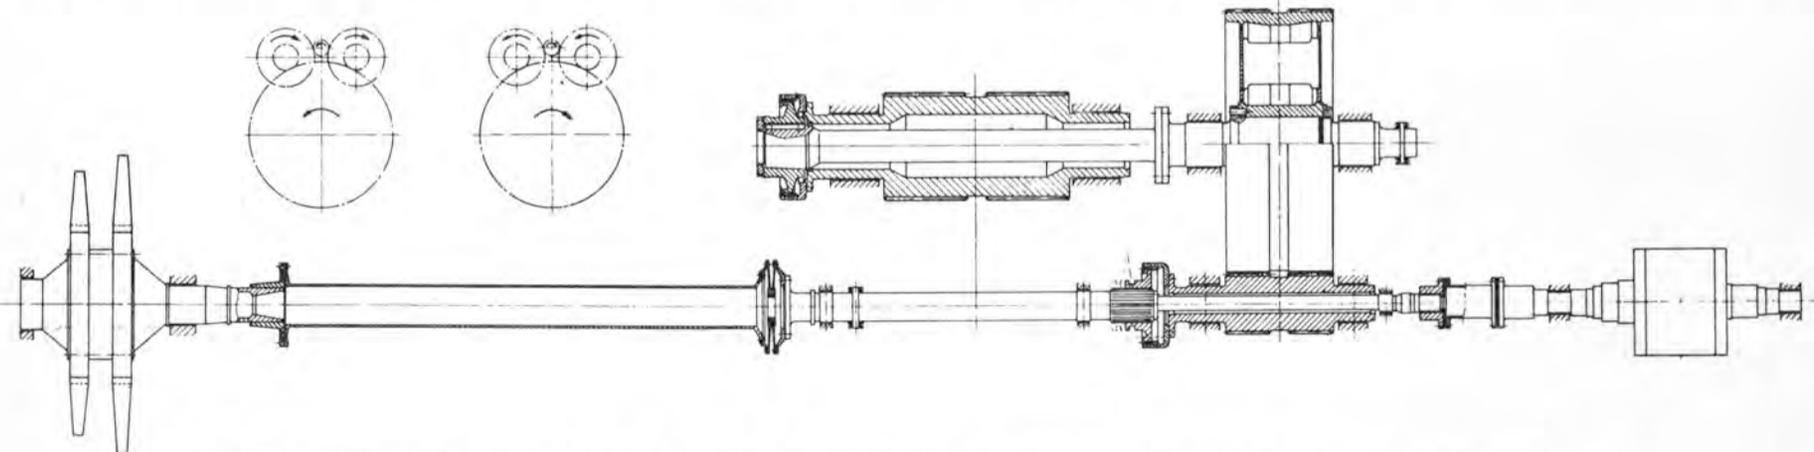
Layout of the high-speed elements and gearing transmission rotating parts for the Euroliner-class containerships built in Germany.
